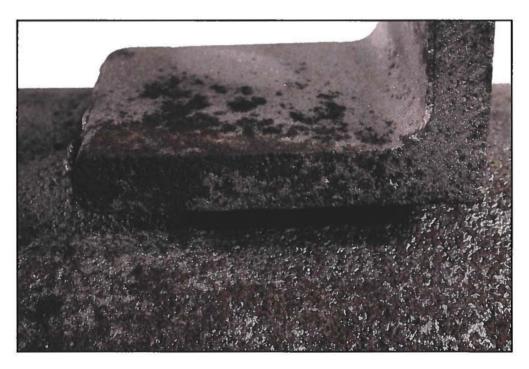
Image of the Lug A4 exterior top weld which exhibited no fusion.
